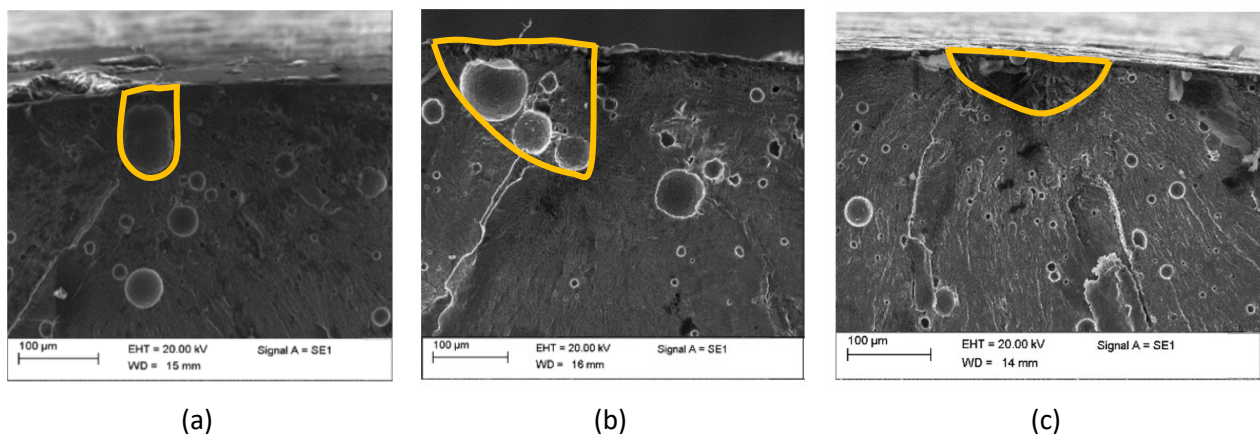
Defects originating failure in HT specimens: (a) single pore (HT); (b) cluster of pores (HT); (c) single surface defect, originating during the removal of supports (HT);
